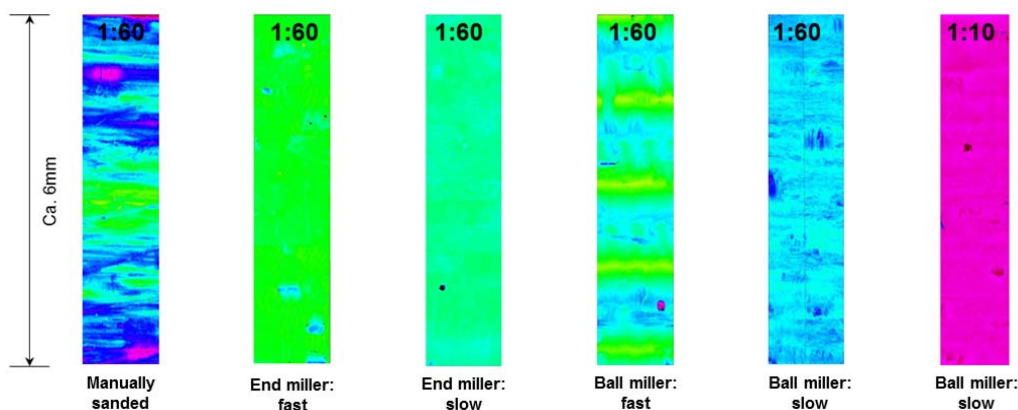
shows the milled surfaces at 20-times magnification. The inhomogeneous surface of the hand-grinded sample compared to the machined samples was already clearly visible on these images. Tool marks (in the case of surfaces of the ball milling cutter, for example) could also be identified. Finally, images at a
